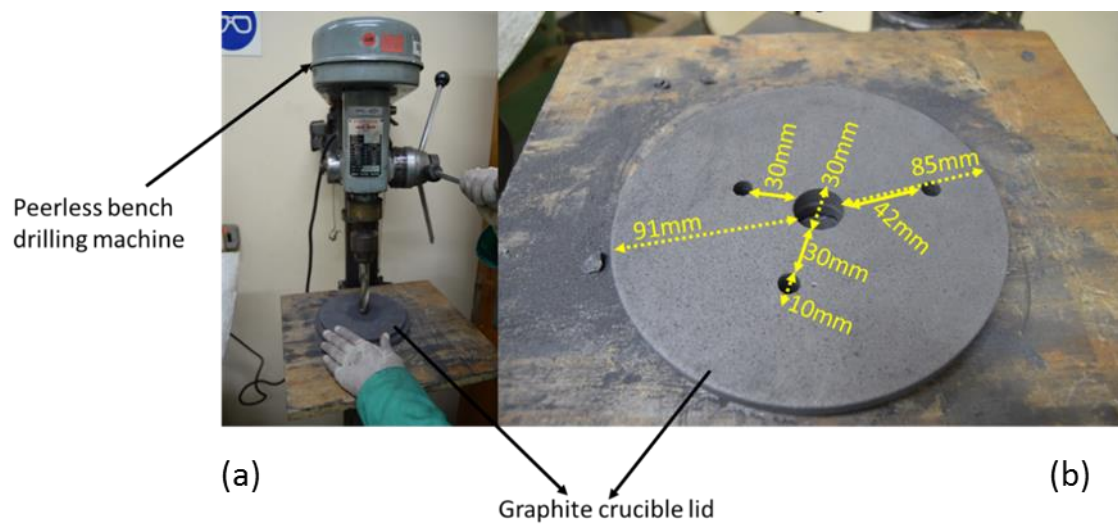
Peerless bench drilling machine (a) and drilled crucible lid (b)
